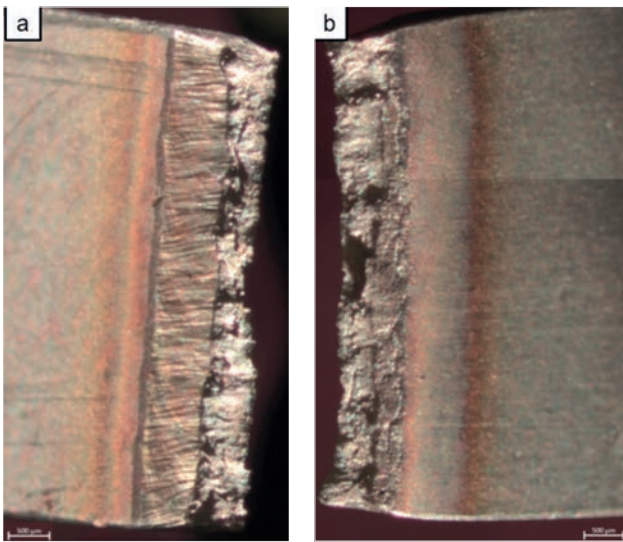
Welded joint fractures: a) on the side of steel AISI 304L and b) on the side of steel AISI 904L
